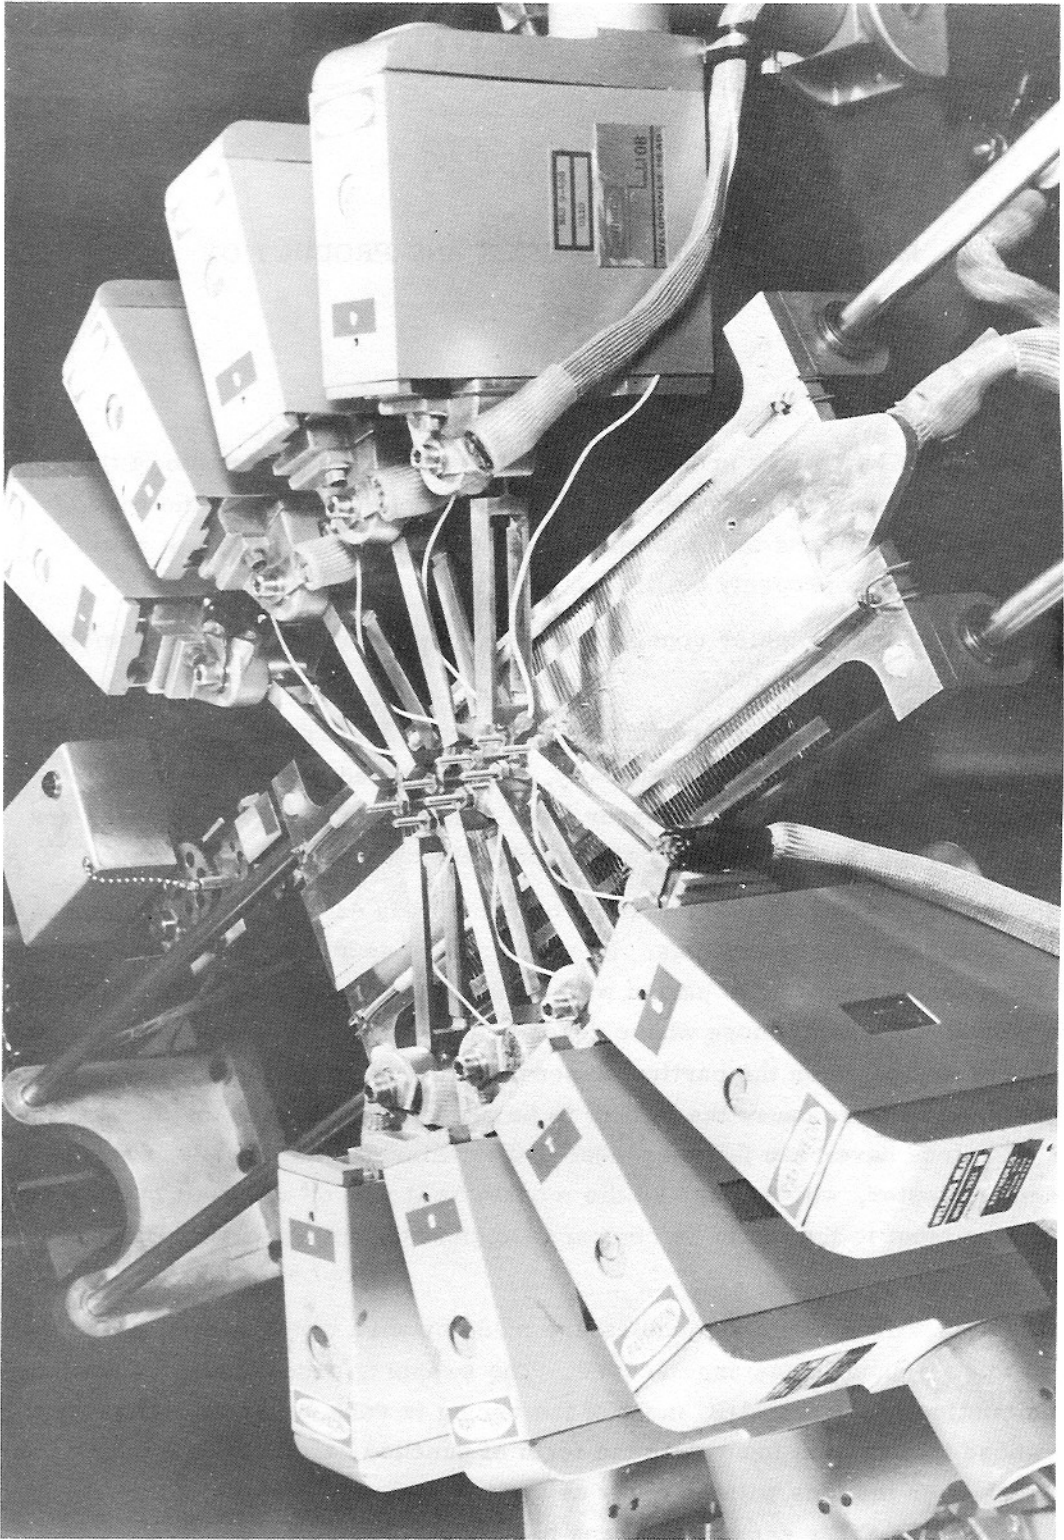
Automatic Fabrication of Welded Matrix
